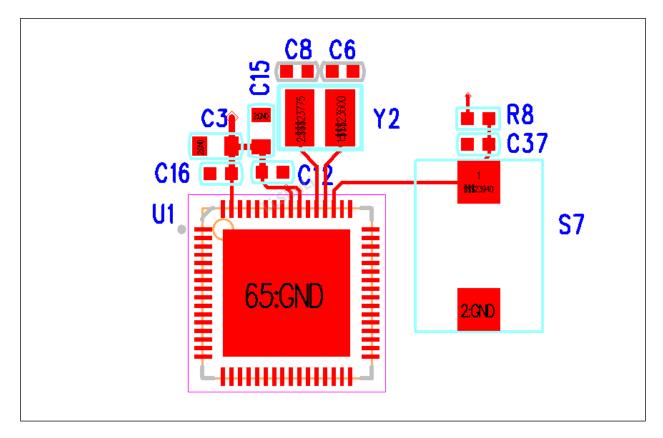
QFN64 Package PCB LAYOUT reference diagram
